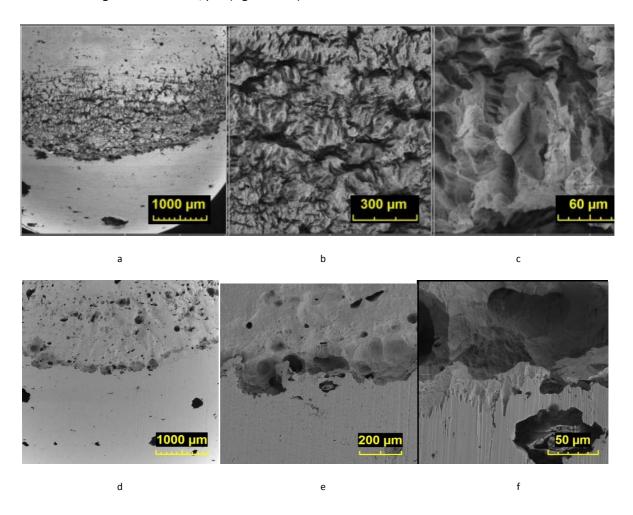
Crevice corrosion on the surface of machined specimens of AISI 316L steel without (a-c) and after (d-f) heat treatment (austenitization)
